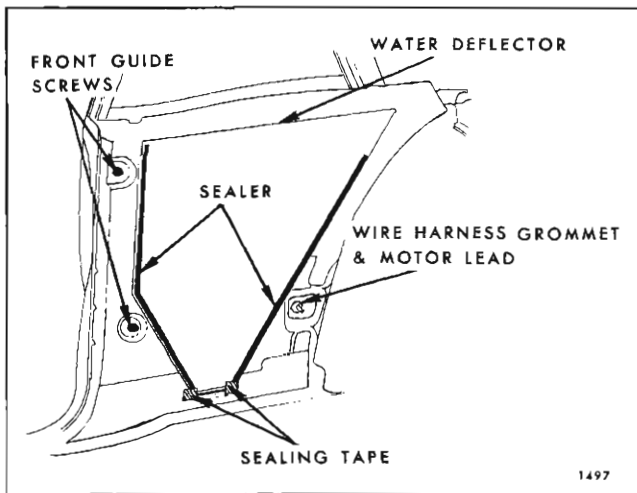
E14—Rear Quarter Inner Panel Sealing "11" Styles
